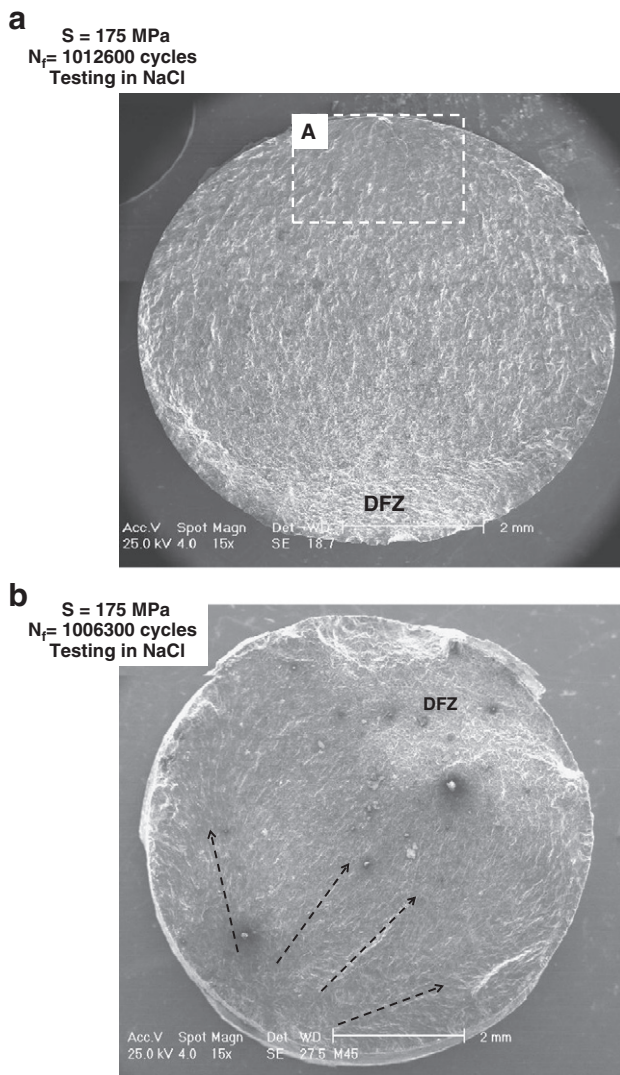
(a) Fracture surface of an uncoated specimen tested in 3% NaCl solution at 175 MPa, which fractured after 1,012,600 loading cycles. (b) Fracture surface of a coated specimen tested in 3% NaCl solution at 175 MPa, which fractured after 1,006,300 loading cycles. The dominance of a single crack, responsible for the fatigue fracture in both samples, is clearly observed.
